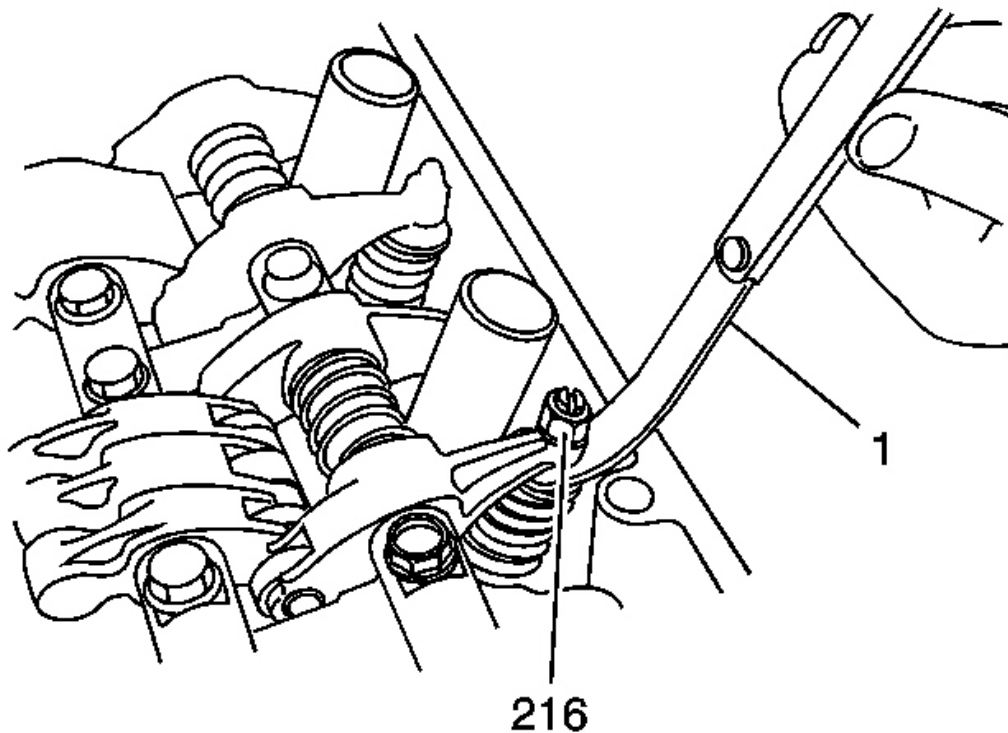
View Of Feeler Gage Between The Adjusting Screws & The Ends Of The Valve Stems
